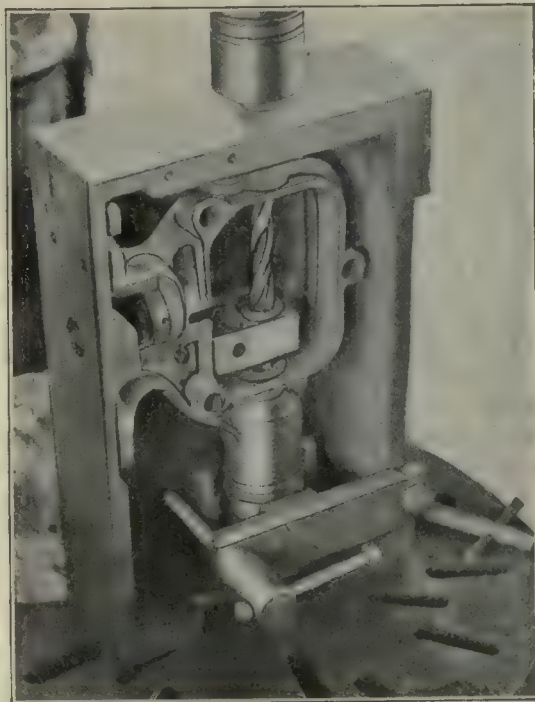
JIG FOR DRILLING WRINGER-GEAR HOUSING
